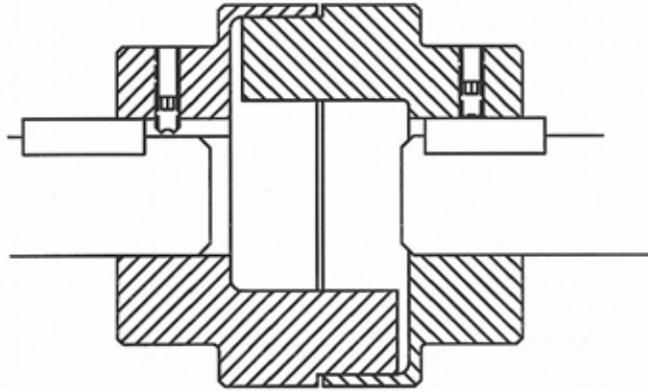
Improper shaft alignment prevents proper setting of setscrew against shaft key.
